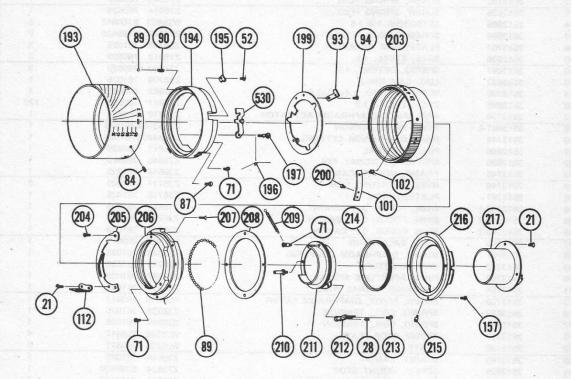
Konica Autoreflex Mount Assembly, Complete (Ref 540, Pg 55)
